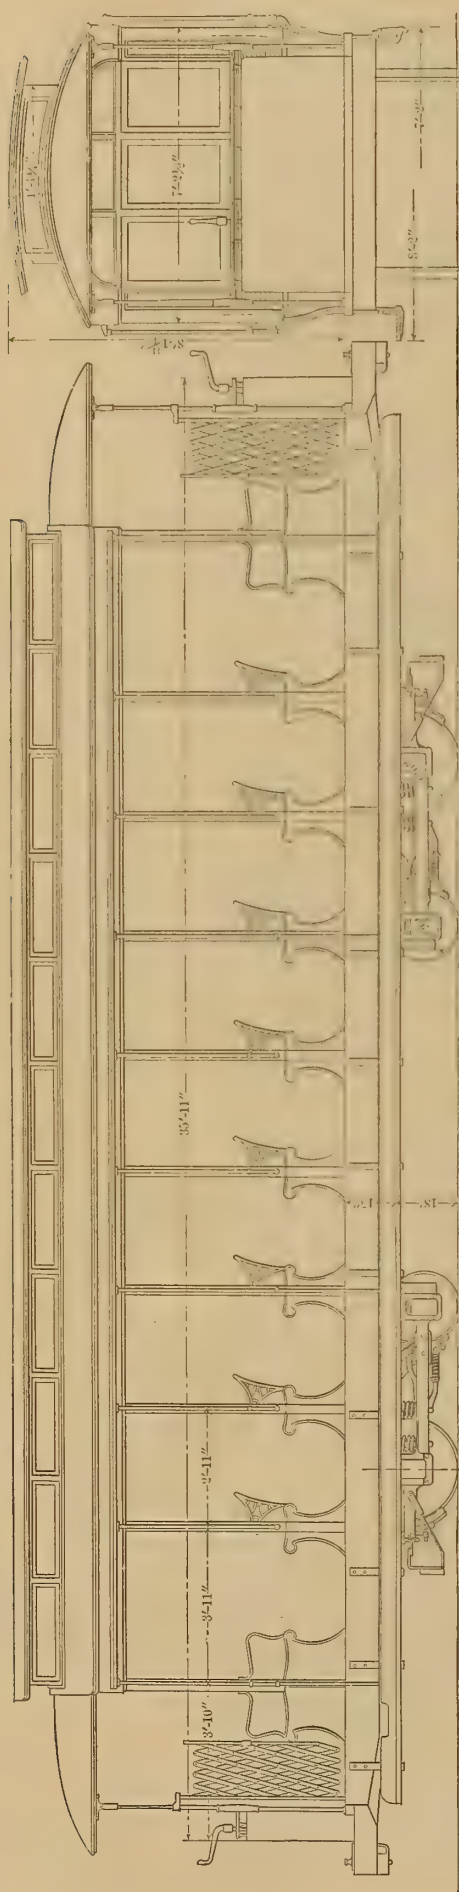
PLAN AND SIDE ELEVATION OF BRILL'S SEMI-CONVERTIBLE CAR. J. G. BRILL CO.
